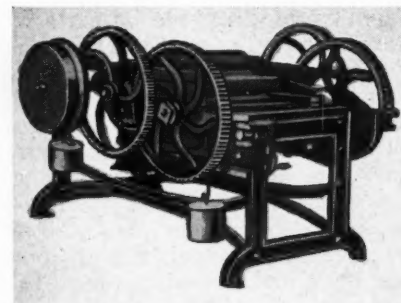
THE FIRST AMERICAN WOOD PLANER
